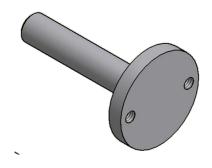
HANDLE SHAFT 3D MODEL.
